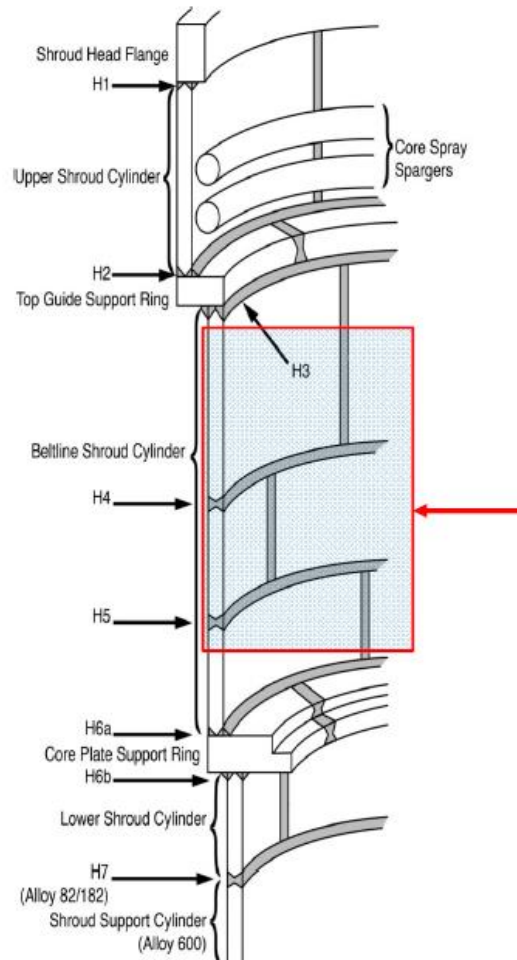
Location of BWR Shroud Off-axis Cracking—nearly all off-axis cracking is between weld numbers H3 and H6a, as shown by the arrow. [14]
